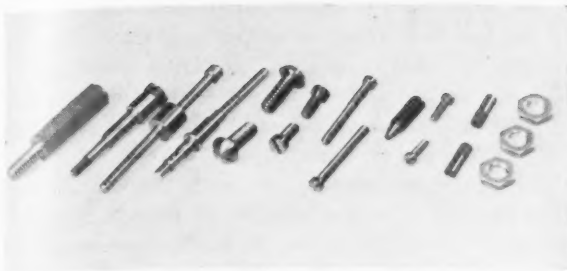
Threaded parts are commonly burnished in submerged barrels to remove burrs and improve surface finish without damaging the threads, which are Class 2 and finer in tolerances.
